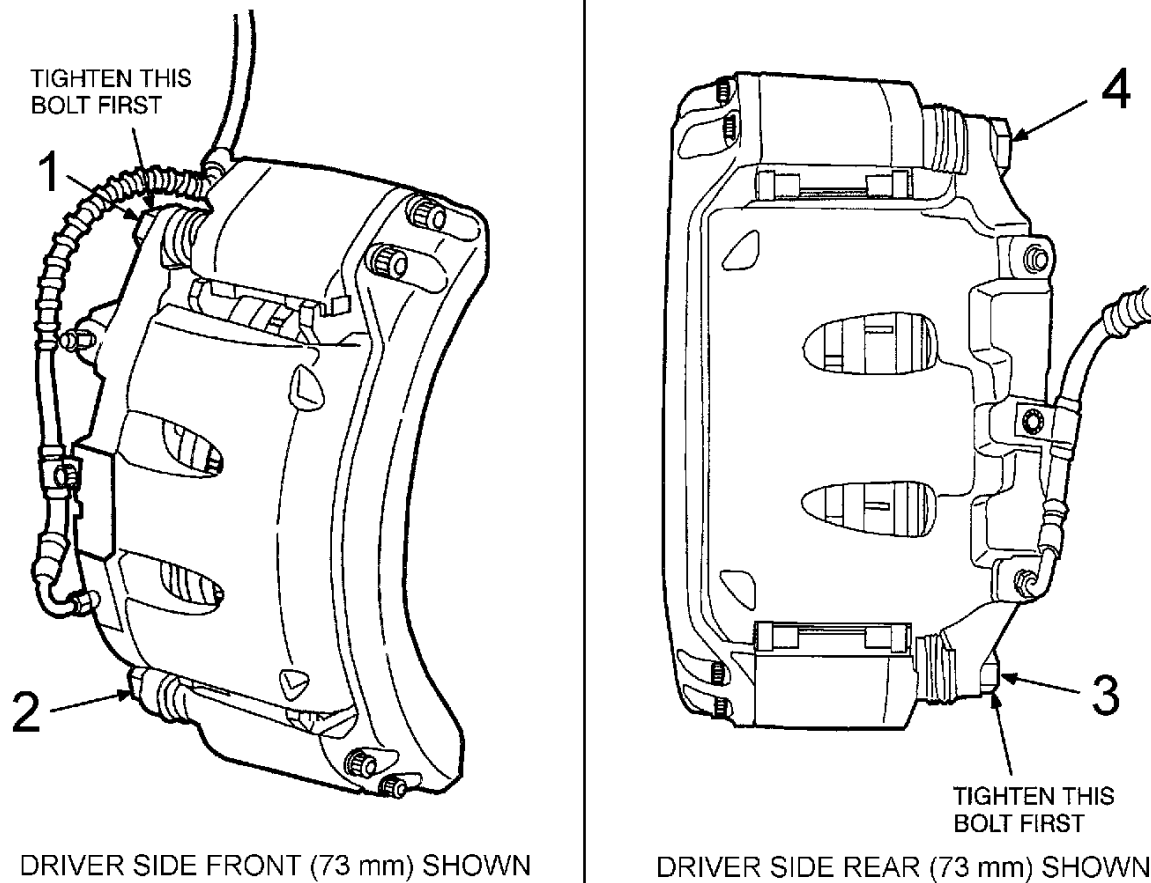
Proper Sequence for Tightening Caliper Hex Mounting Bolts
